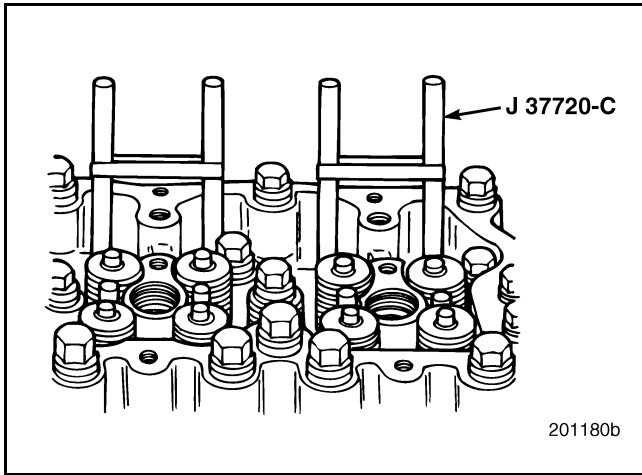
Valve Lifter (Tappet) Holder Tool J 37720-C
